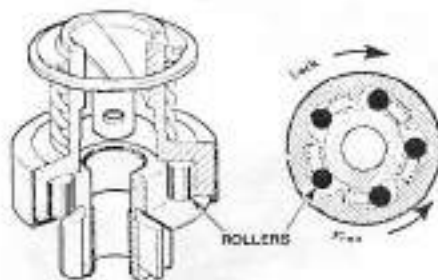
Cross-sectional view of roller clutch assembly. Clutch will lock up when turned in one direction but will turn freely when turned in opposite direction.
